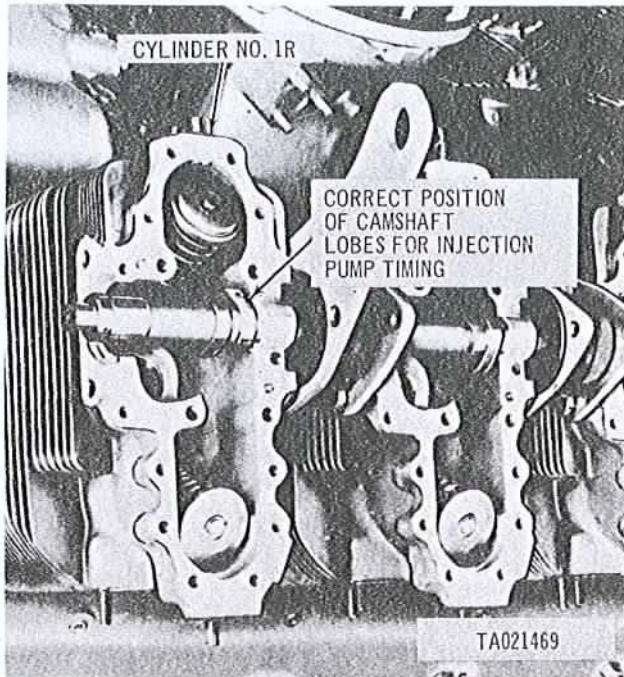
Correct position of cylinder 1R camshaft lobes (cams) for fuel injection pump installation - installed view.
